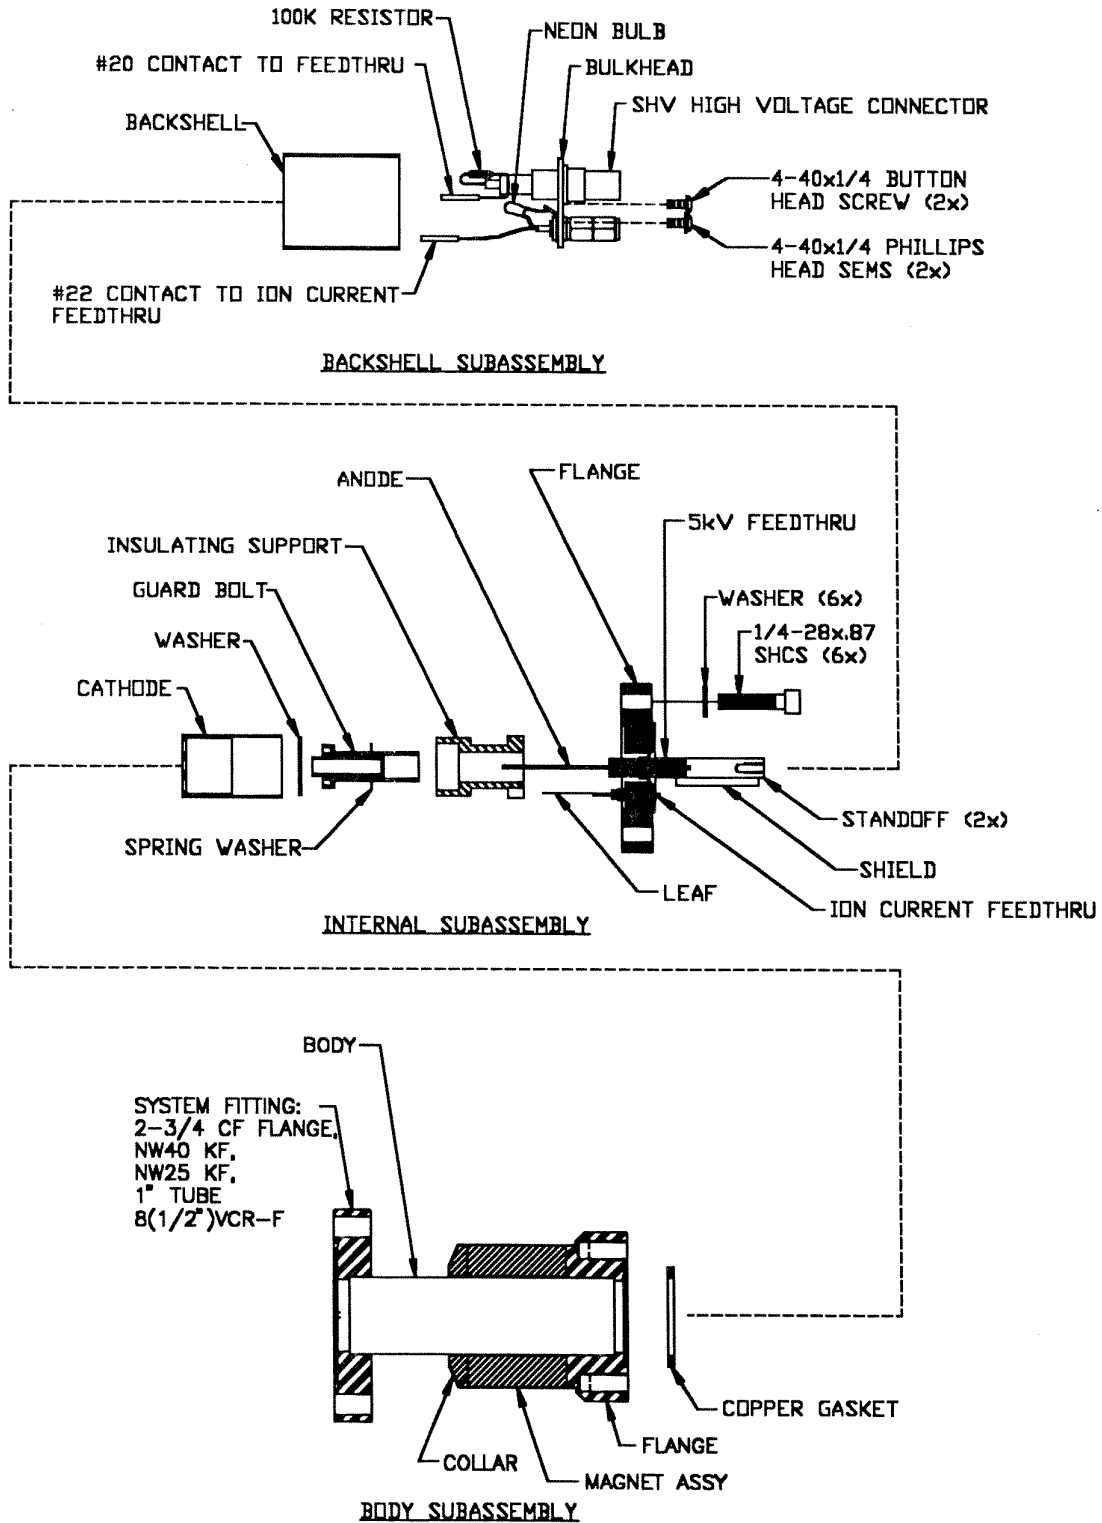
COLD CATHODE GAUGE TUBE, EXPLODED VIEW
